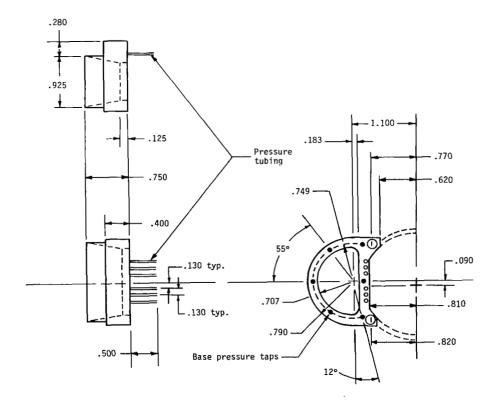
Details of exit choke ring. Linear dimensions are inches.
